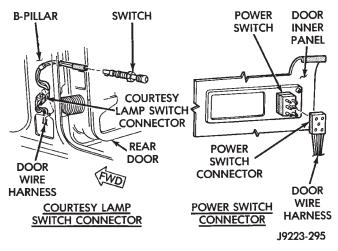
XJ Rear Door Courtesy Lamp and Power Switch Wire Harness Connectors
